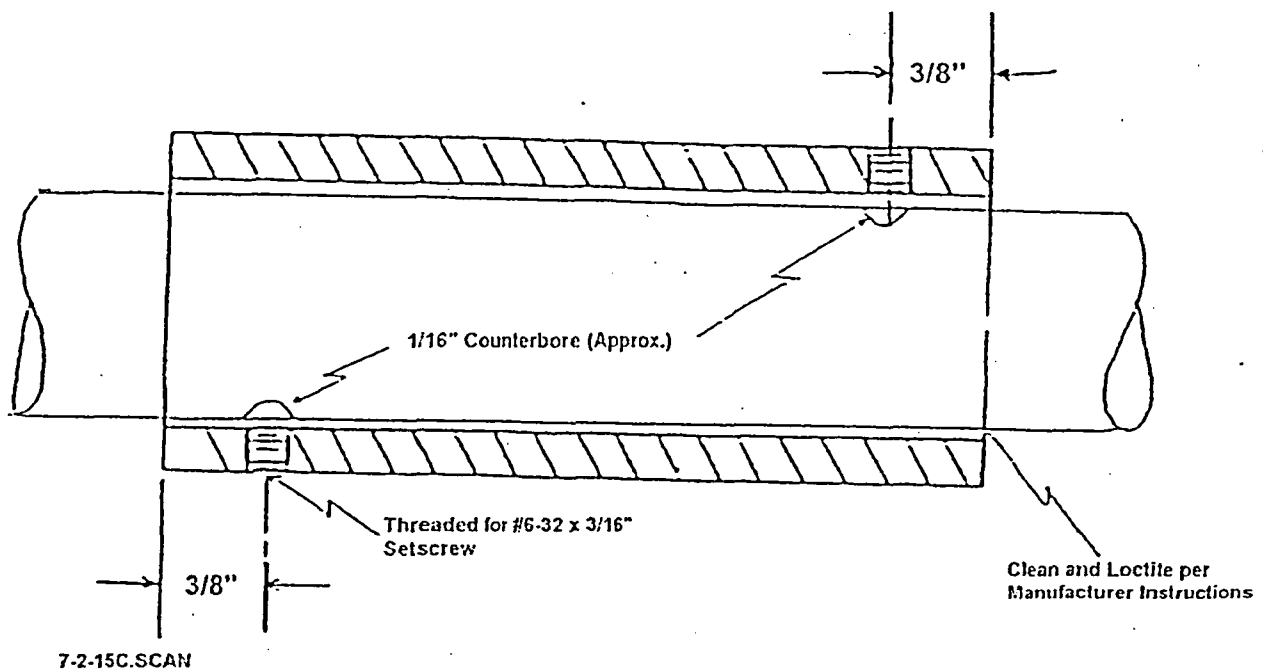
Service Water Top Shaft Sleeve (Packing) (14) Installation Drawing
